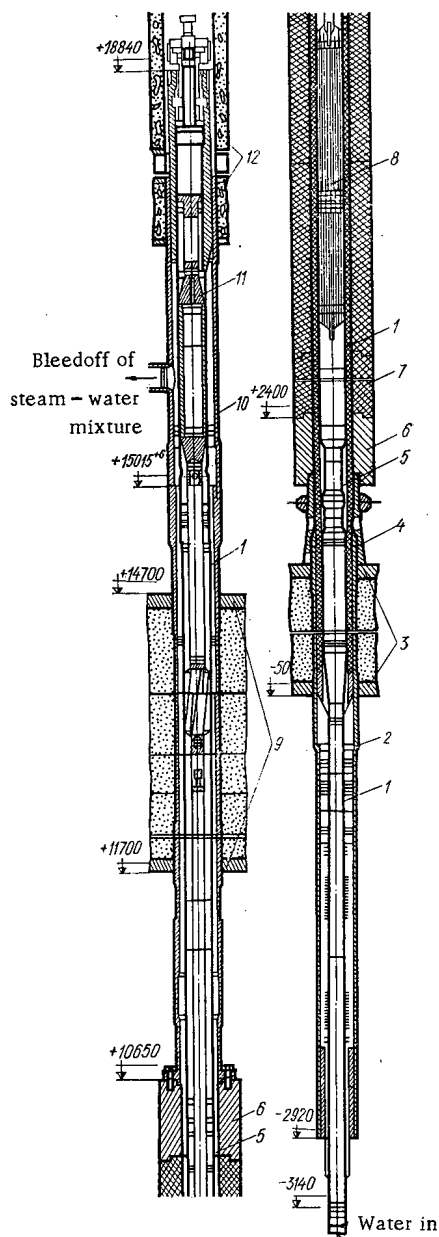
Fuel channel: pressurized tube; 2) channel passage; 3) bottom shielding plate; 4) support sleeve; 5) adapter (steel-zirconium); 6) thermal shield; 7) stacking block; 8) fuel assembly; 9) top shielding plate; 10) fuel channel head; 11) fuel assembly suspension support; 12) removable shielding plug.
